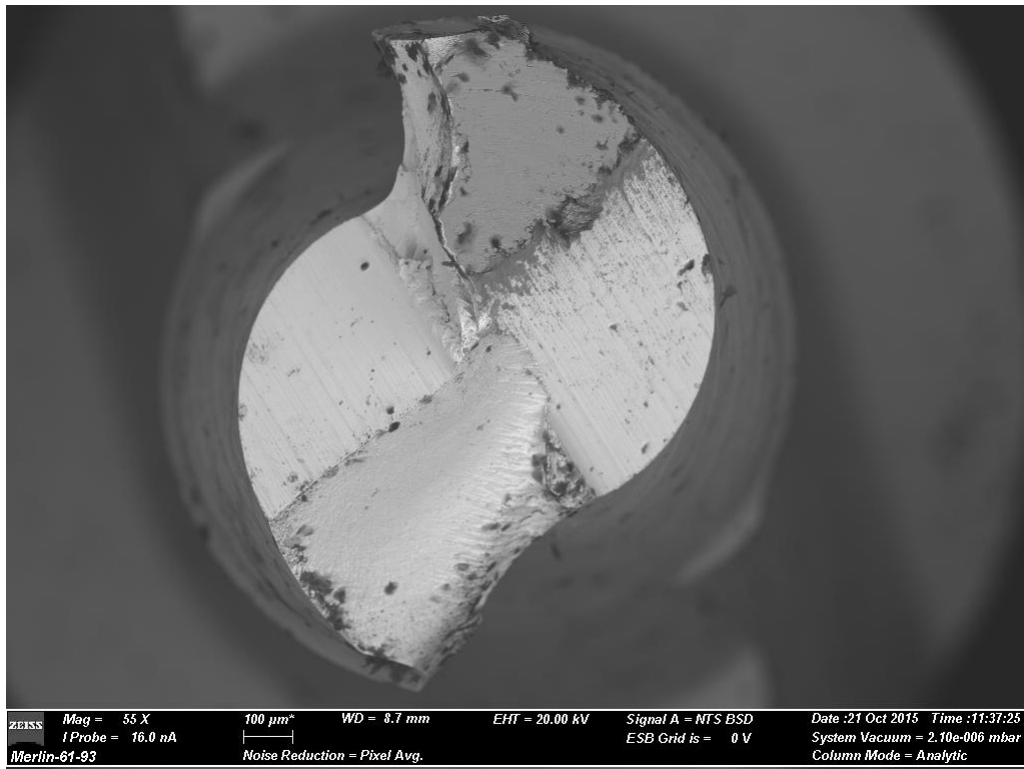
Experimental run 4: Tungsten carbide tool after machining with parameters $v_c=80.11$ [m/min], $v_f=937.3$ [mm/min] and $a_p=143.58$ [μm]
